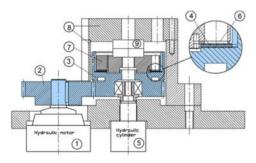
The Wet Clutch Test Rig. Shaded parts are rotating during operation.
